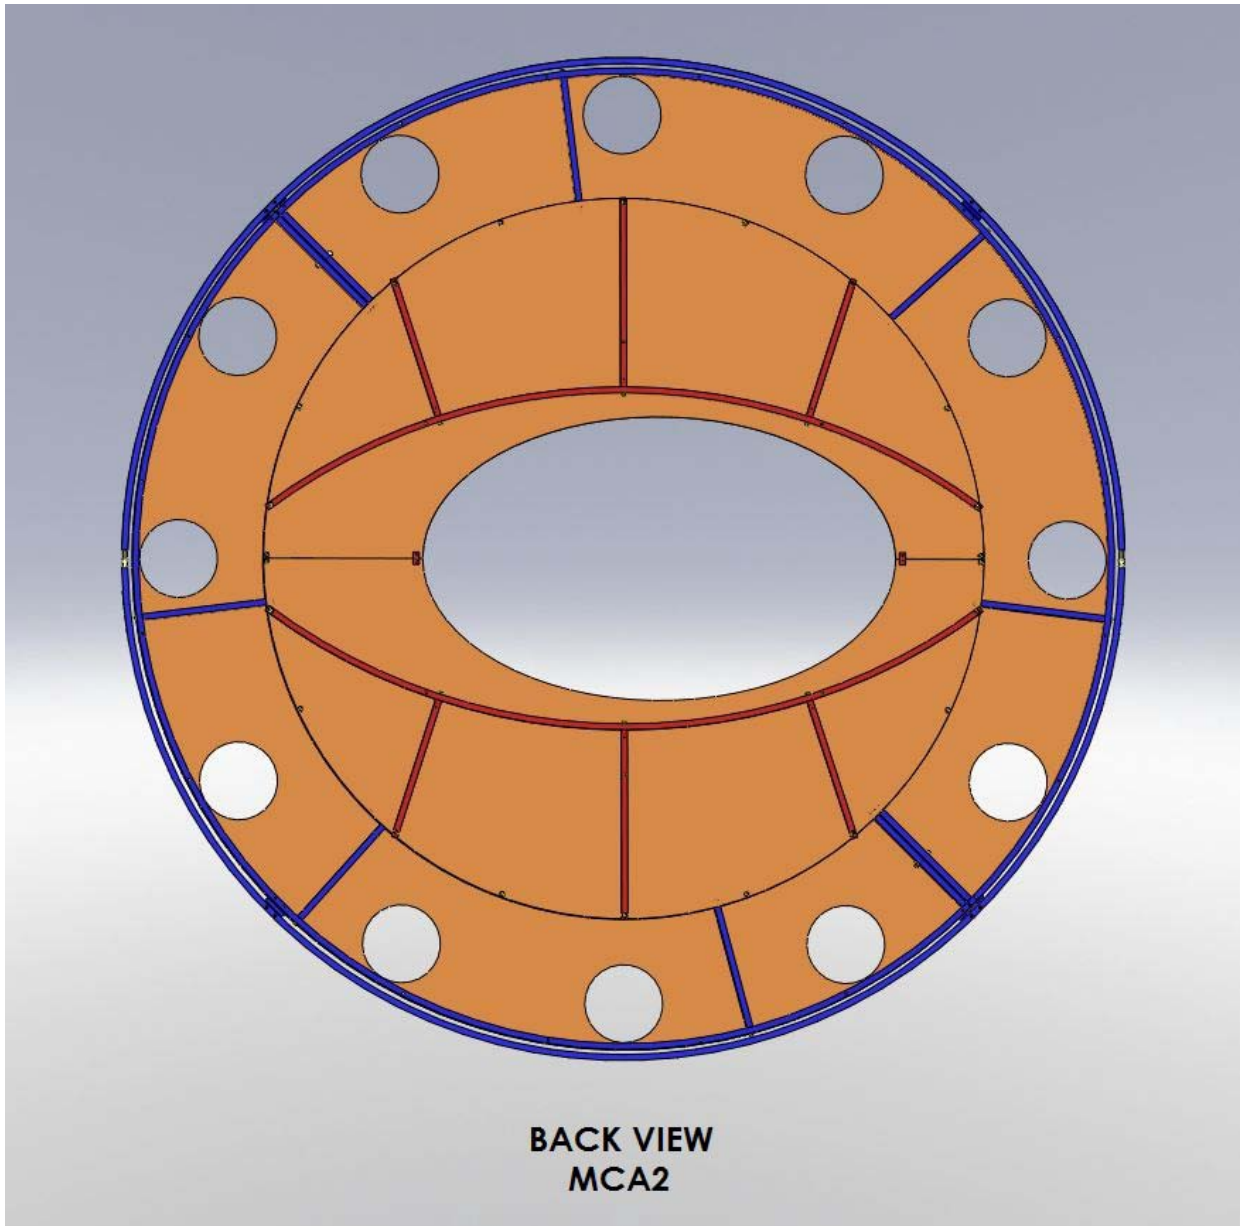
Back View of MCA2 Mode Cleaner Tube Baffle
